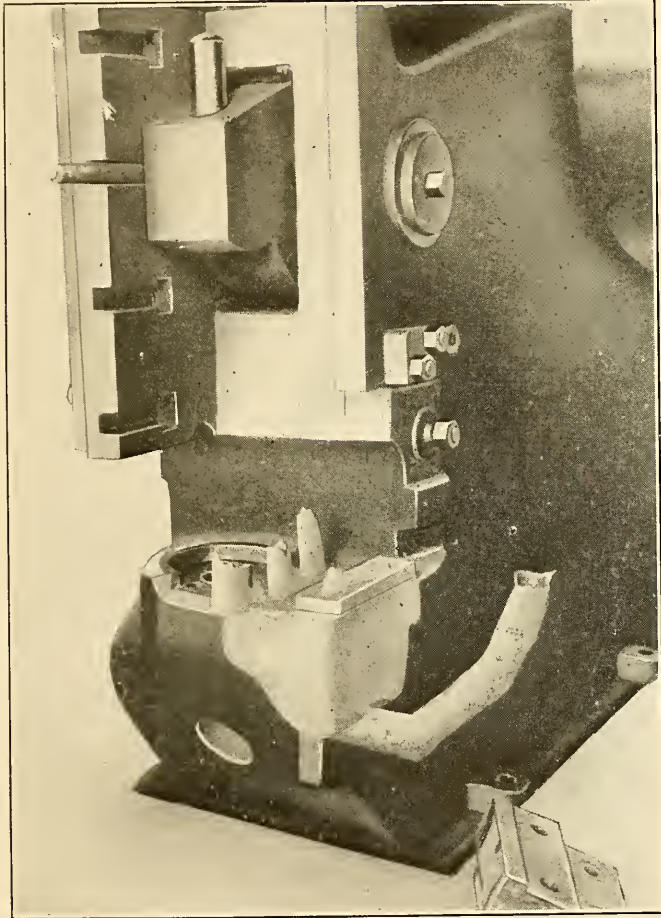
New Jaw Burned to Frame Casting of Heavy Shear.
